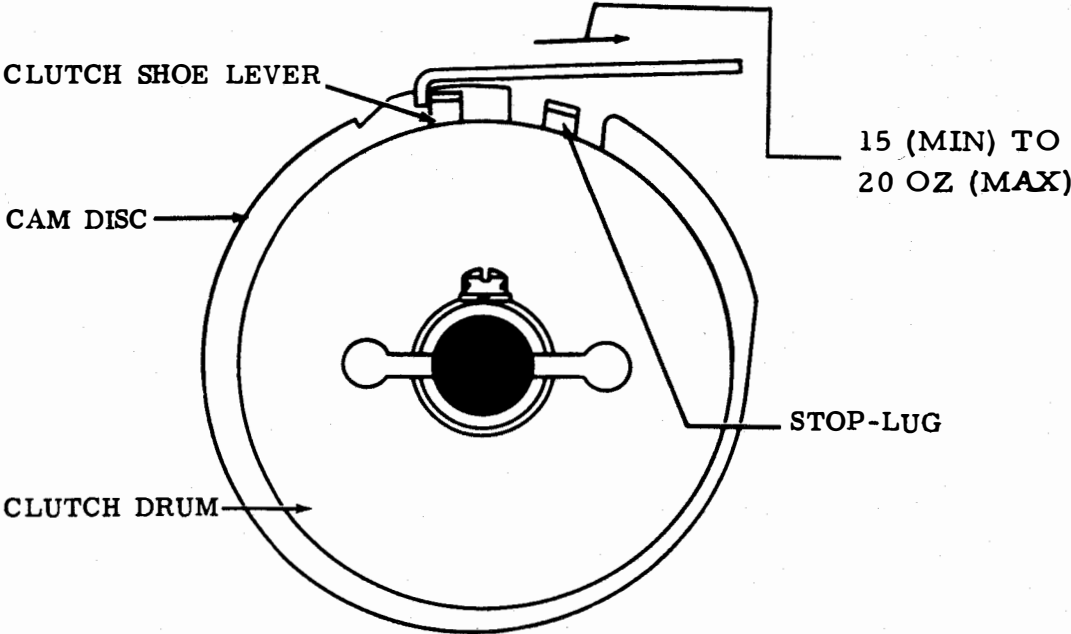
Function Clutch Drum End Play For Two-Shaft Units - Right Side View
